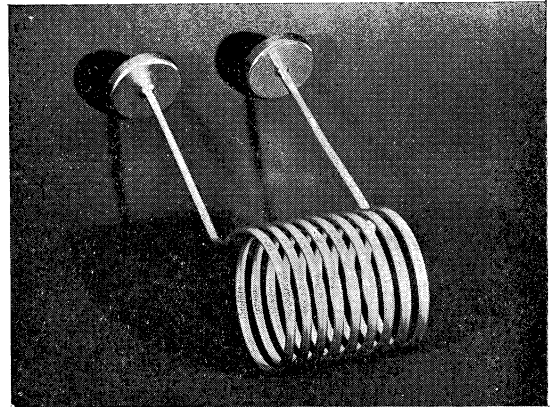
$\lambda/2$ helix fabricated of niobium with electron beam welded flanges.
